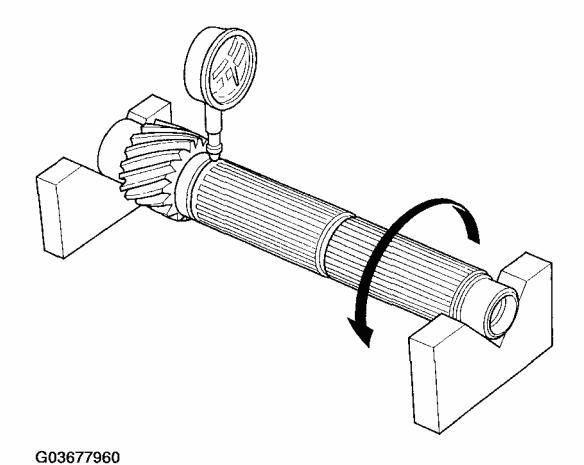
Measuring Countershaft Runout Courtesy of AMERICAN HONDA MOTOR CO., INC.
